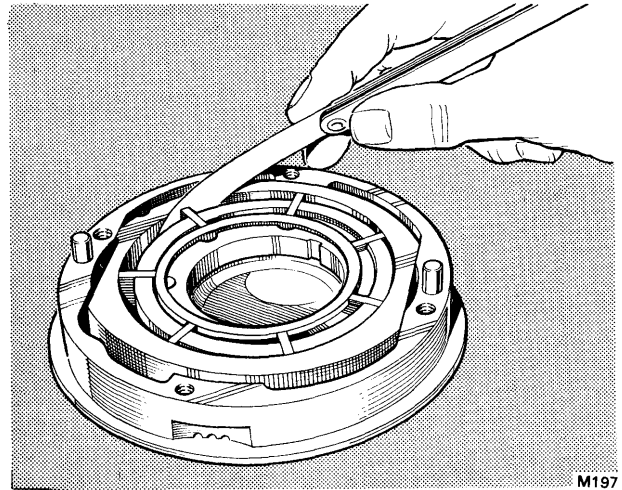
CHECKING THE VANE DIAMETRICAL CLEARANCE
